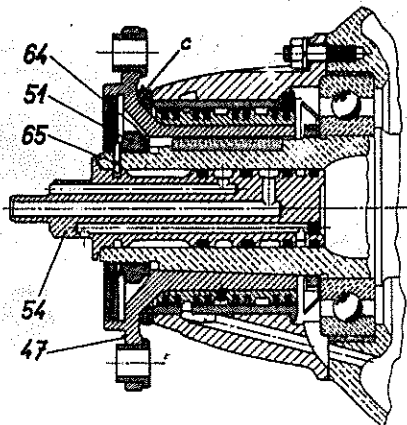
Fixing the oil distributor rotor and the insertion piece
